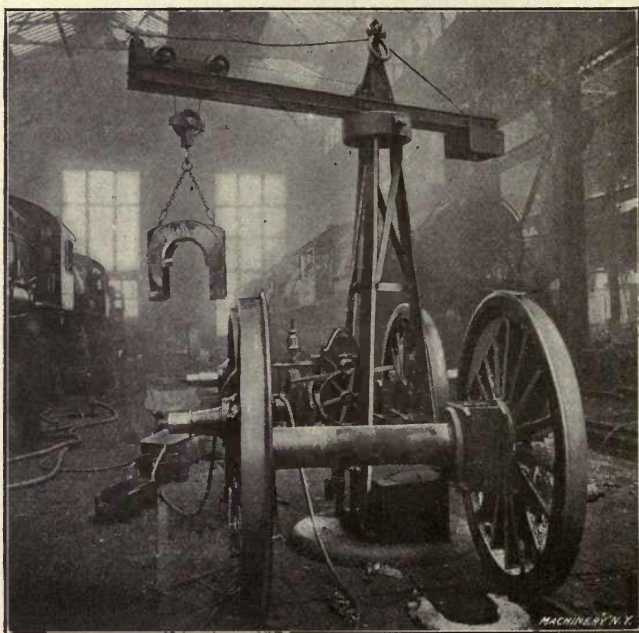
Pneumatic Hoist used for Lifting Boxes when fitting them to the Journals
